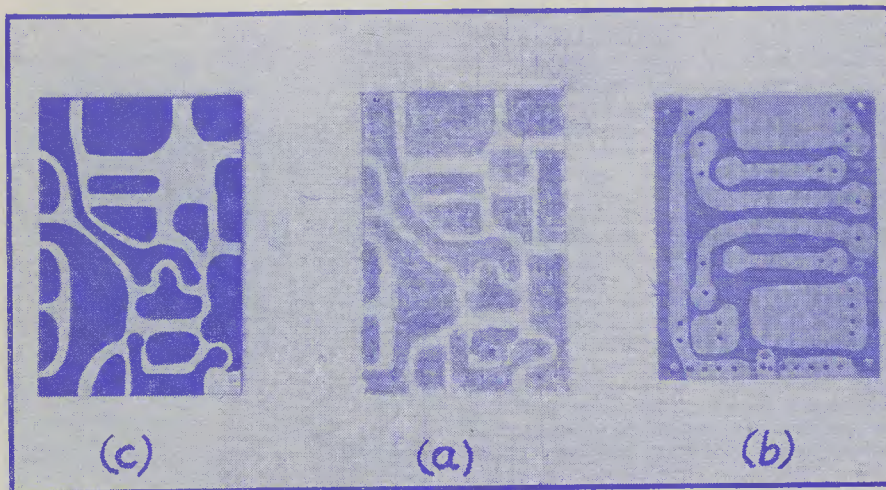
(a) Receiver panel pencil sketched; (b) Transistor multi-vibrator panel ready for assembly; (c) Painted ready for etching
